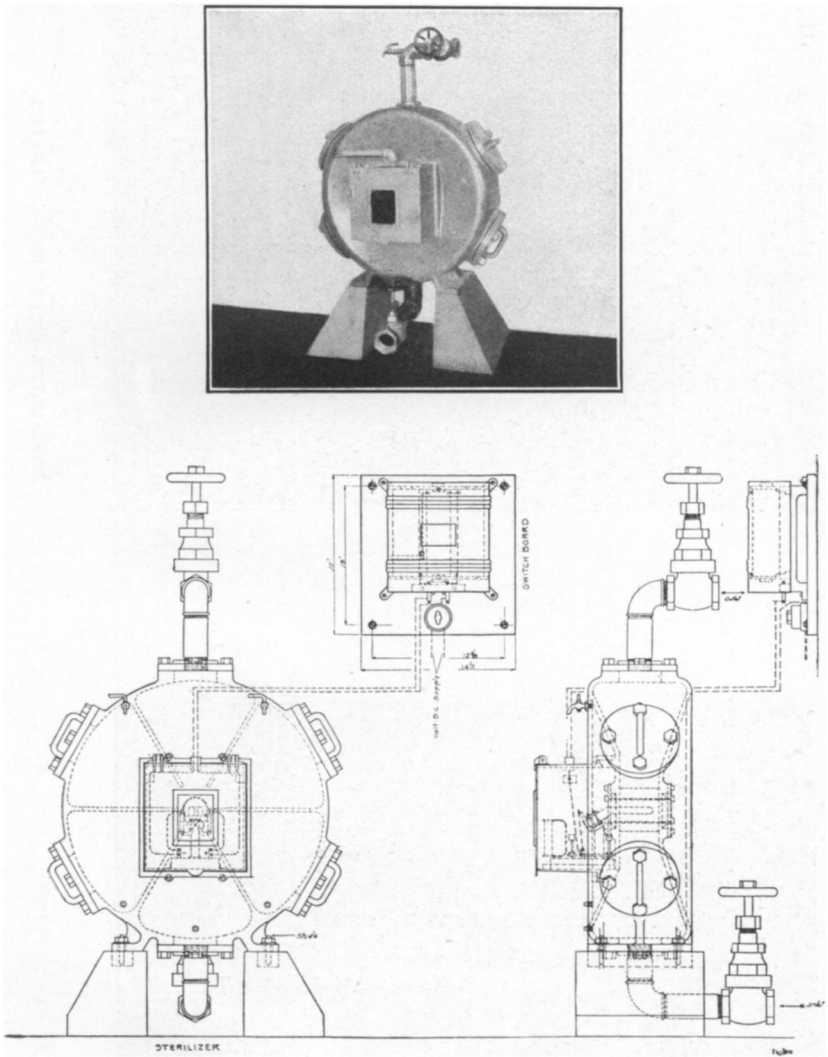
PHOTOGRAPH AND DRAWING OF ULTRA-VIOLET LIGHT STERILIZER OF THE PRESSURE TYPE. THIS APPARATUS USES THE PISTOL TYPE OF LAMP.
